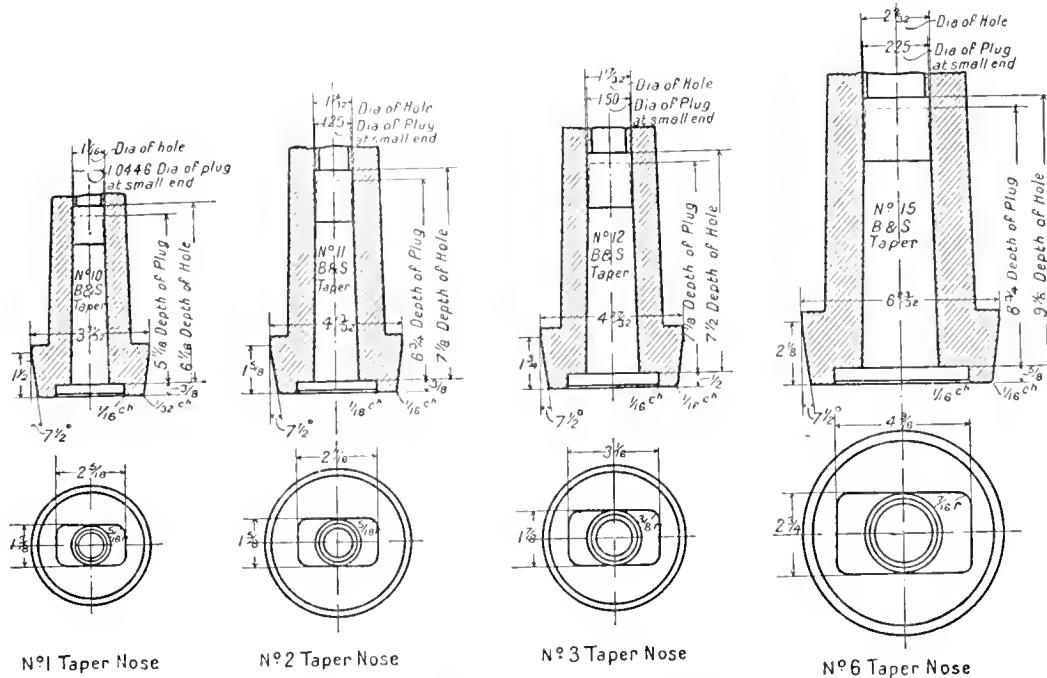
SUGGESTED STANDARD NOSES FOR MILLING-MACHINE SPINDLES
